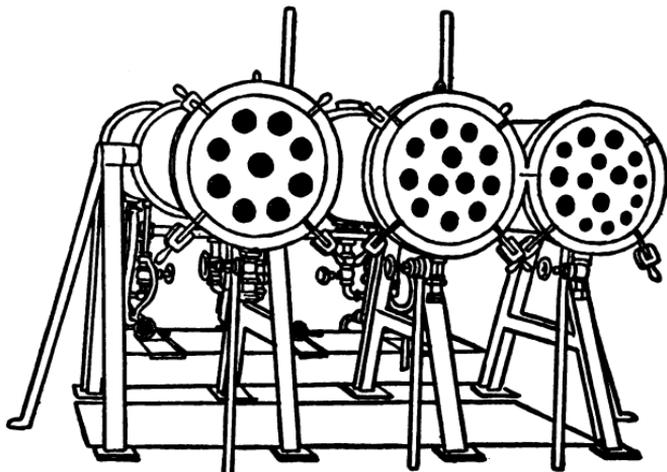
Roller Casting Apparatus in horizontal position for cleaning after a cast, also for making ready for a casting. Under the machine are the steam and hot and cold water pipes and attachments. The opening in the floor is to allow the rollers to descend to the floor below as they come from the mold. See also Fig. 5.
